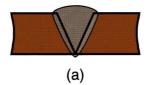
(a) Desired weld profile for single V-groove weld joint.
